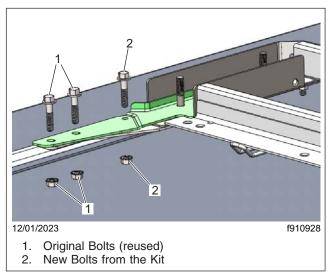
, Installing the 3/8-Inch Wall Bracket Bolts and Nuts
